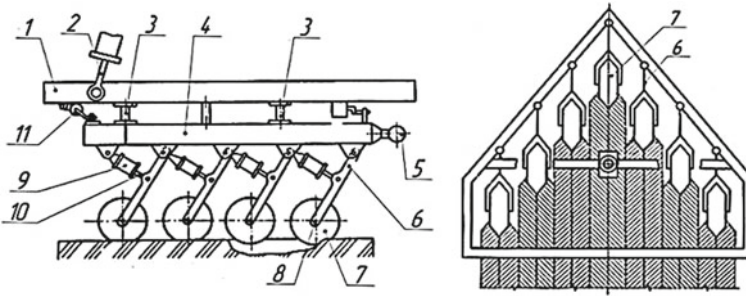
Working body of the ice-cutting machine: 1, 4—frame; 2, 11—hydraulic cylinder; 3, 5—ball joint; 6 levers; 7—disc cutters; 8—axis; 9—telescopic hydraulic cylinder; and 10—stocks
